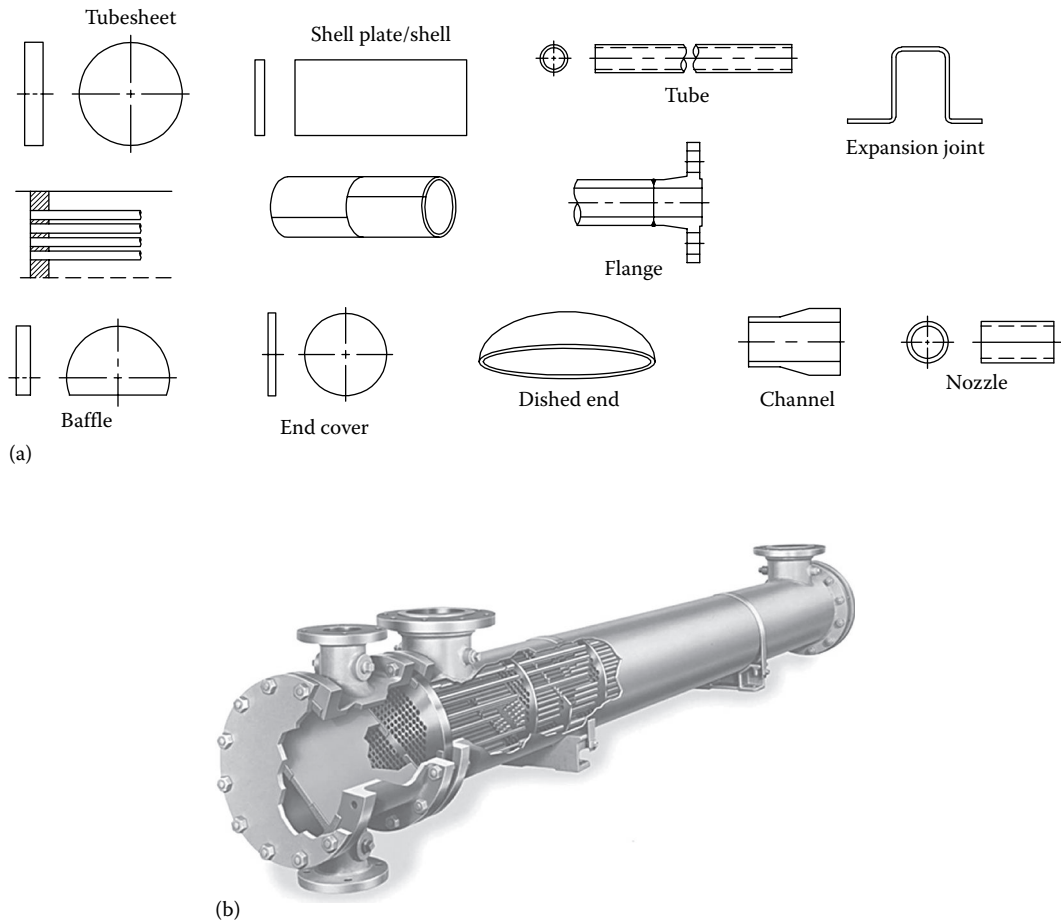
(a) Major components of a shell and tube heat exchanger. (b) Cut section of a shell and tube heat exchanger. (Courtesy of API Heat Transfer Inc., Buffalo, NY.)
